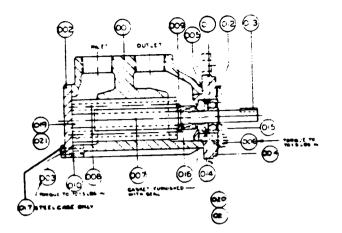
Integral flange mounted pumps are equipped with four 7/16-inch diameter holes equally spaced on a 4-1/2-inch diameter bolt center for mounting in any attitude.
